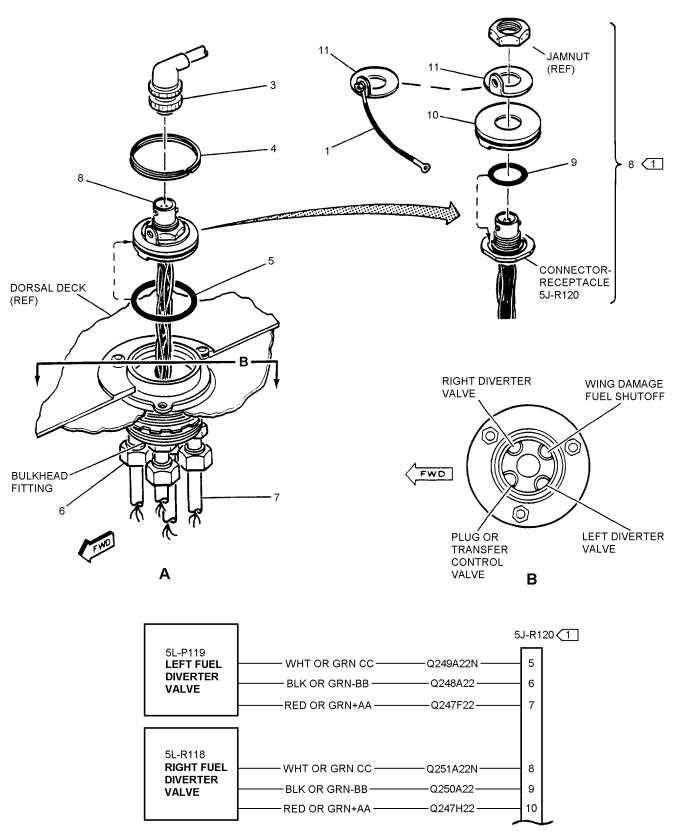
Fuel Diverter Valve (5L-P119 or 5L-R118) (Sheet 2)
